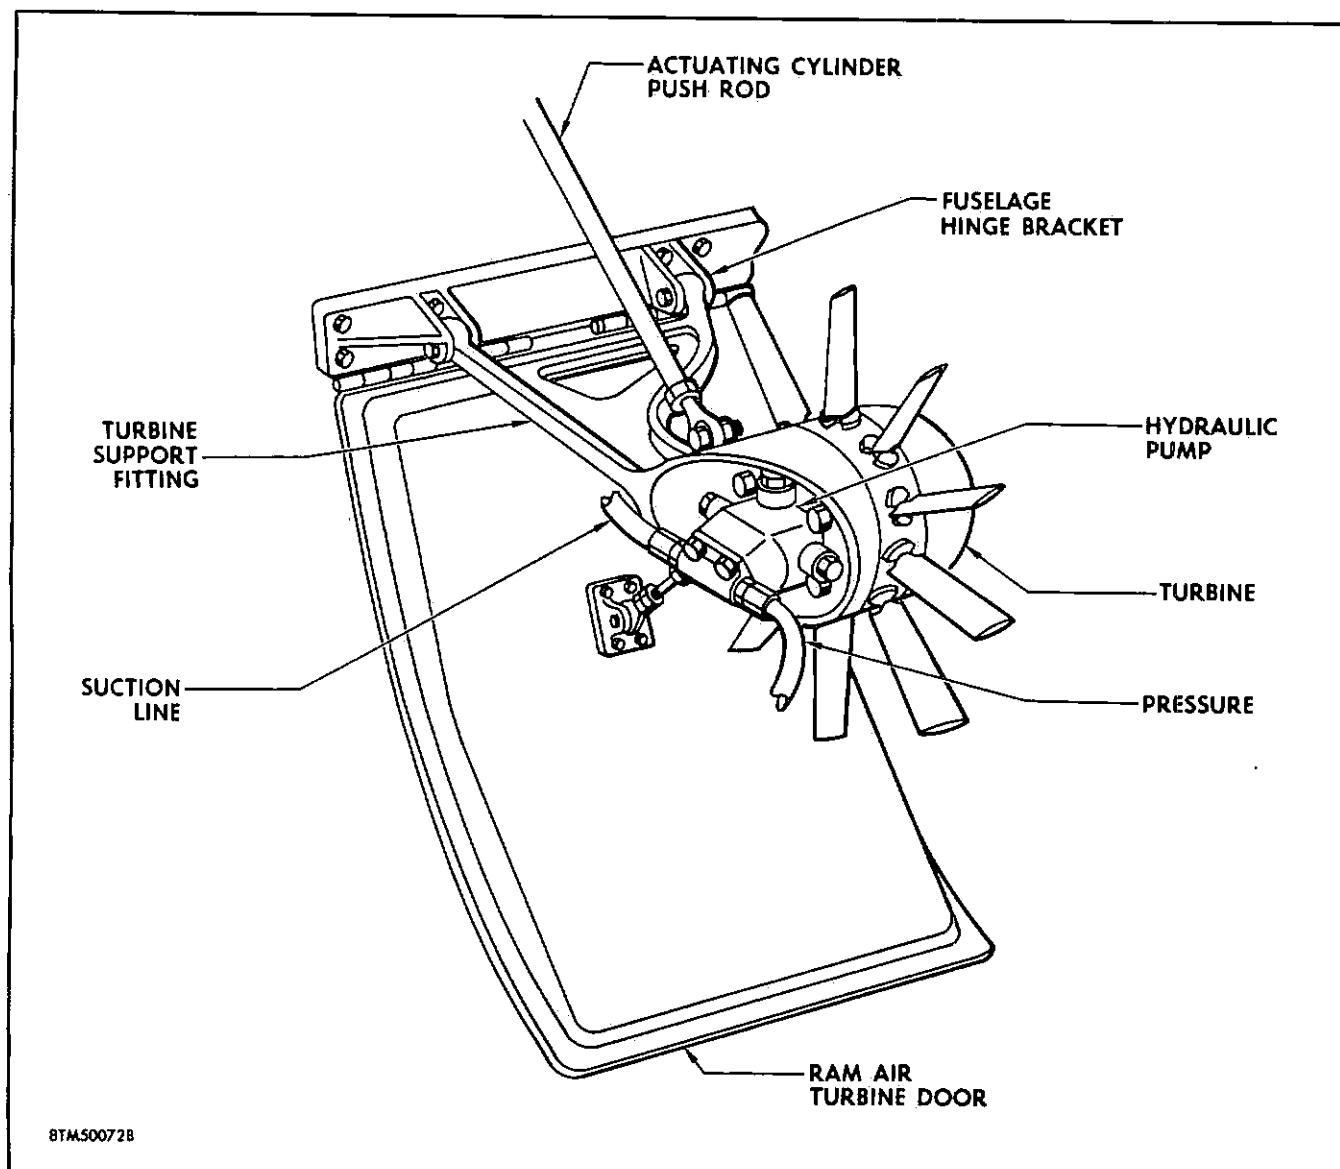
Emergency Hydraulic Pump and Ram Air Driven Turbine
